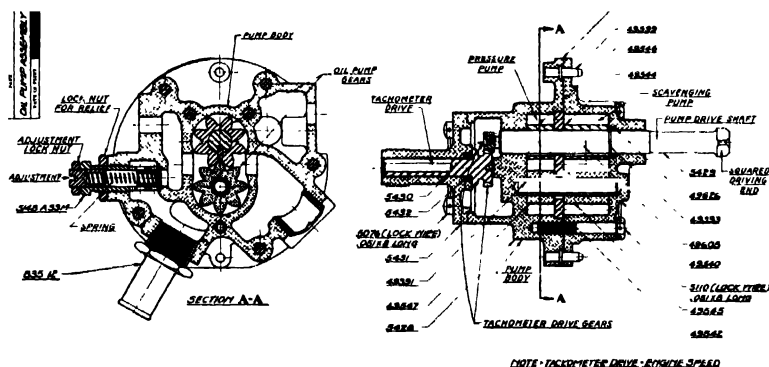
Sectional Drawing Showing Oil Pump Assembly of Camenz Engine.
